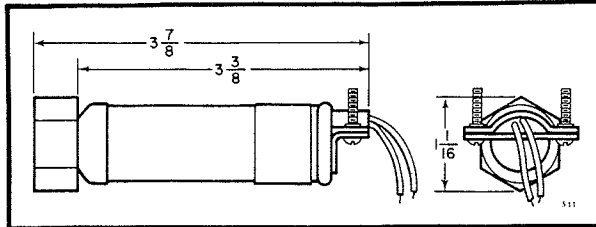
INSTALLATION DIMENSIONS OF C7027A.
